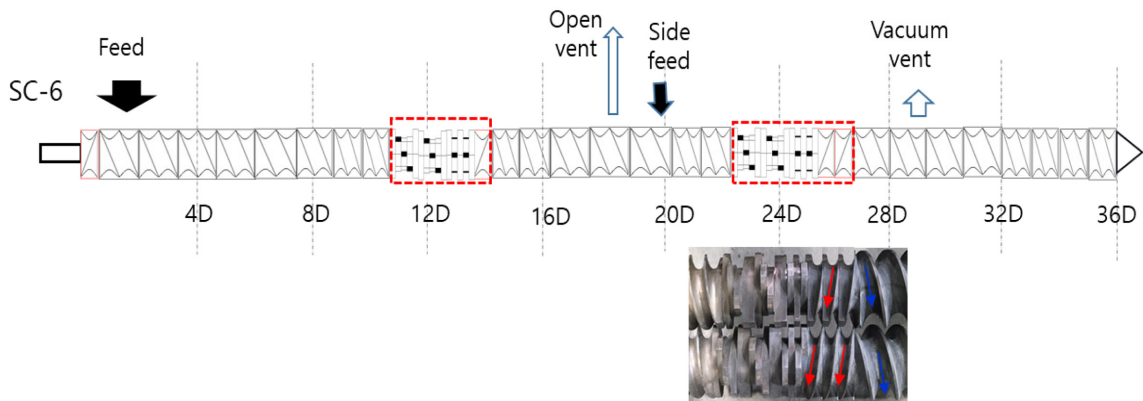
Screw configuration of an intermeshing co-rotating twin screw extruder for reactive extrusion process.
